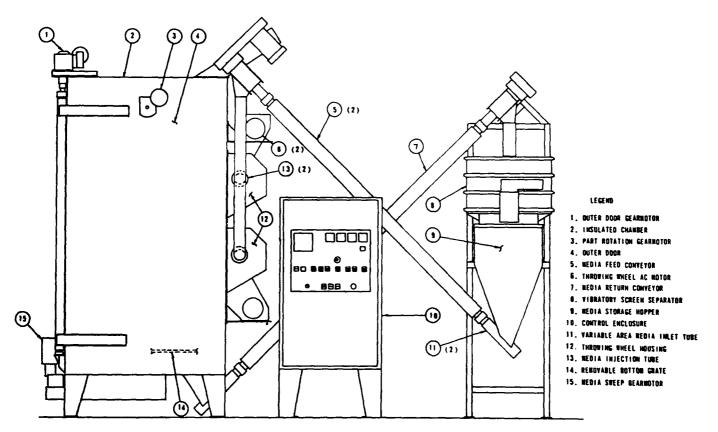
The CRYO-STRIP® cryogenic coating removal system.
